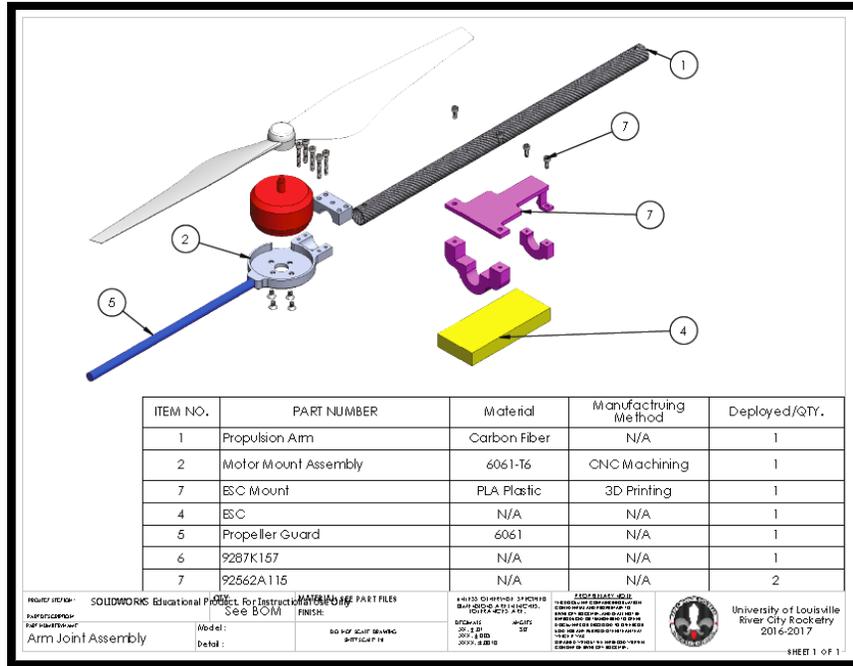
Detailed drawing and exploded view of the Motor Assembly.
